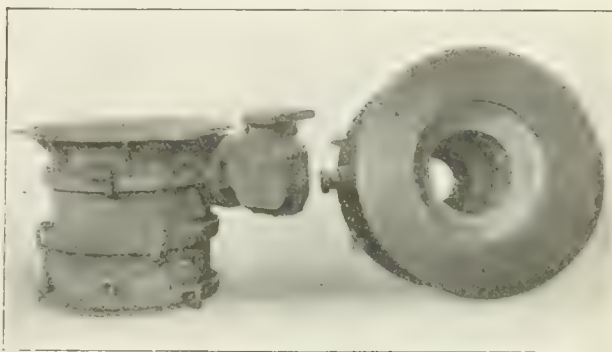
The Mold with the Drag Ready for Chilling and the Rings Assembled.
